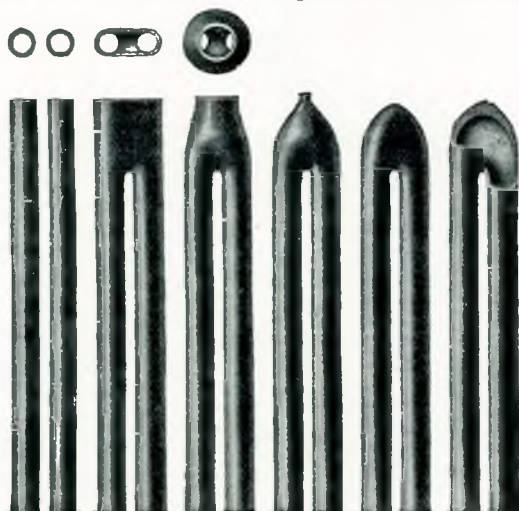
Steps in the manufacture of integrally machine forged return bends.
